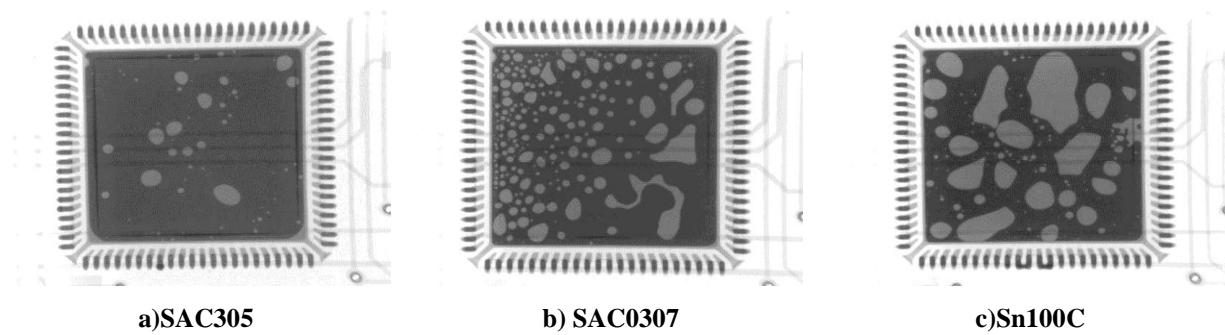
X Ray images of QFN88 components assembled with different lead-free alloy solder pastes. Low/no silver alloy solder pastes resulted in more voids and larger voids than SAC305 solder paste.
